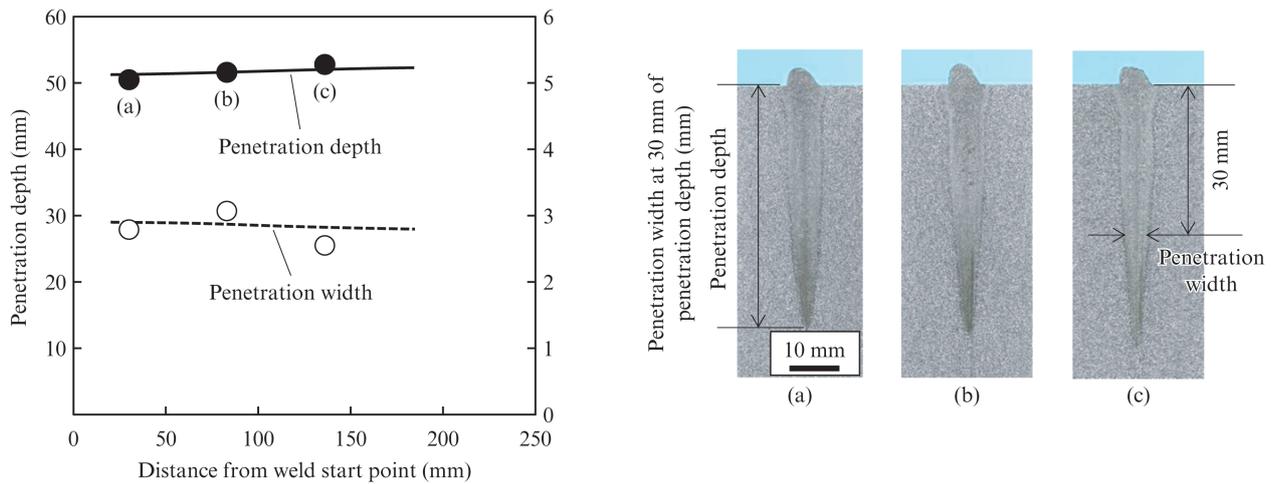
Penetration shape change with elapsed welding time after optimization of focusing optics (Atmospheric pressure: 100 Pa, Laser power: 30 kW, Welding speed: 0.5 m/min, Melt run)
